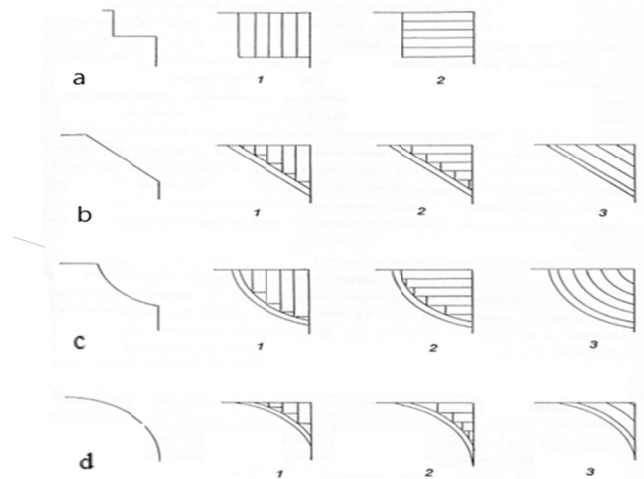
Tool Movement Schemes for Machining Elementary Surfaces: (a) cylindrical and face; (b) conical; (c) concave spherical; (d) convex spherical; 1 – perpendicular to the workpiece axis; 2 – parallel to the workpiece axis; 3 – equidistant to the profile.
